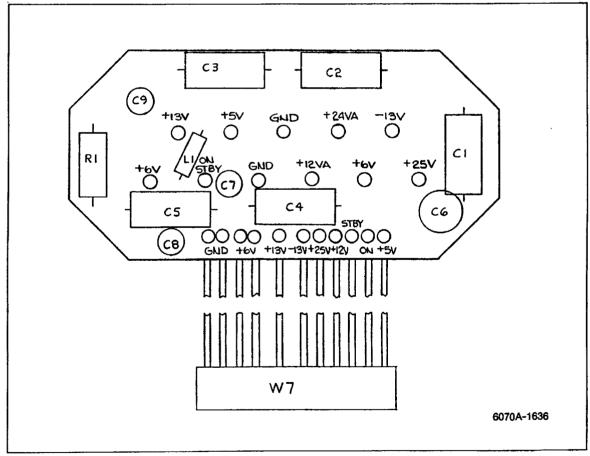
A5A6 Power Supply Capacitor PCB Assembly
